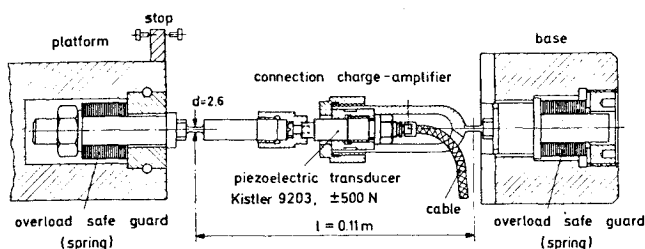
Longitudinal section of the elements W , S_1 , and S_2 arranged in the x - y plane.
